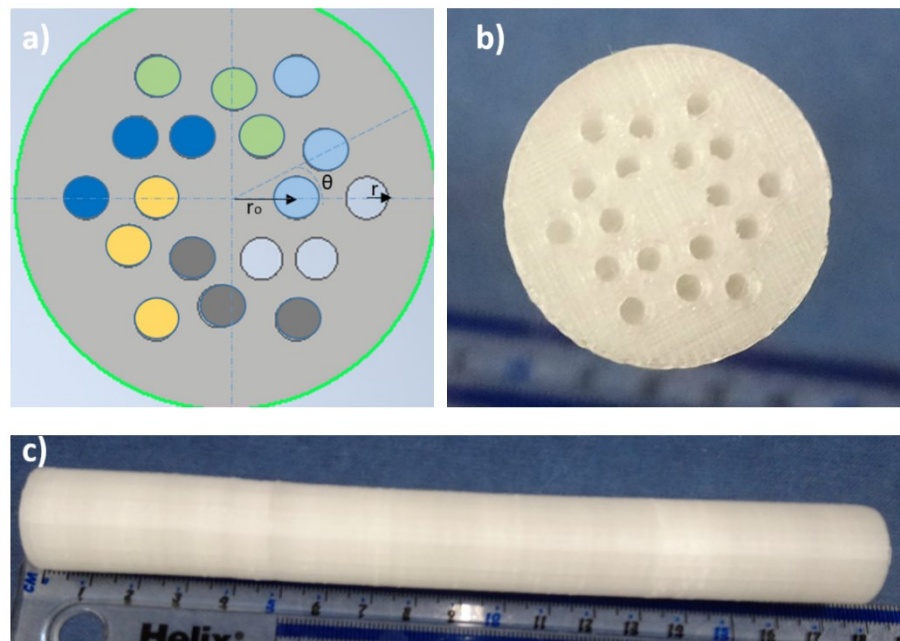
3D printed COC preform using spiral PCF design; a) CAD model; b) cross-sectional image of the printed preform; and c) image of the longitudinal section.
